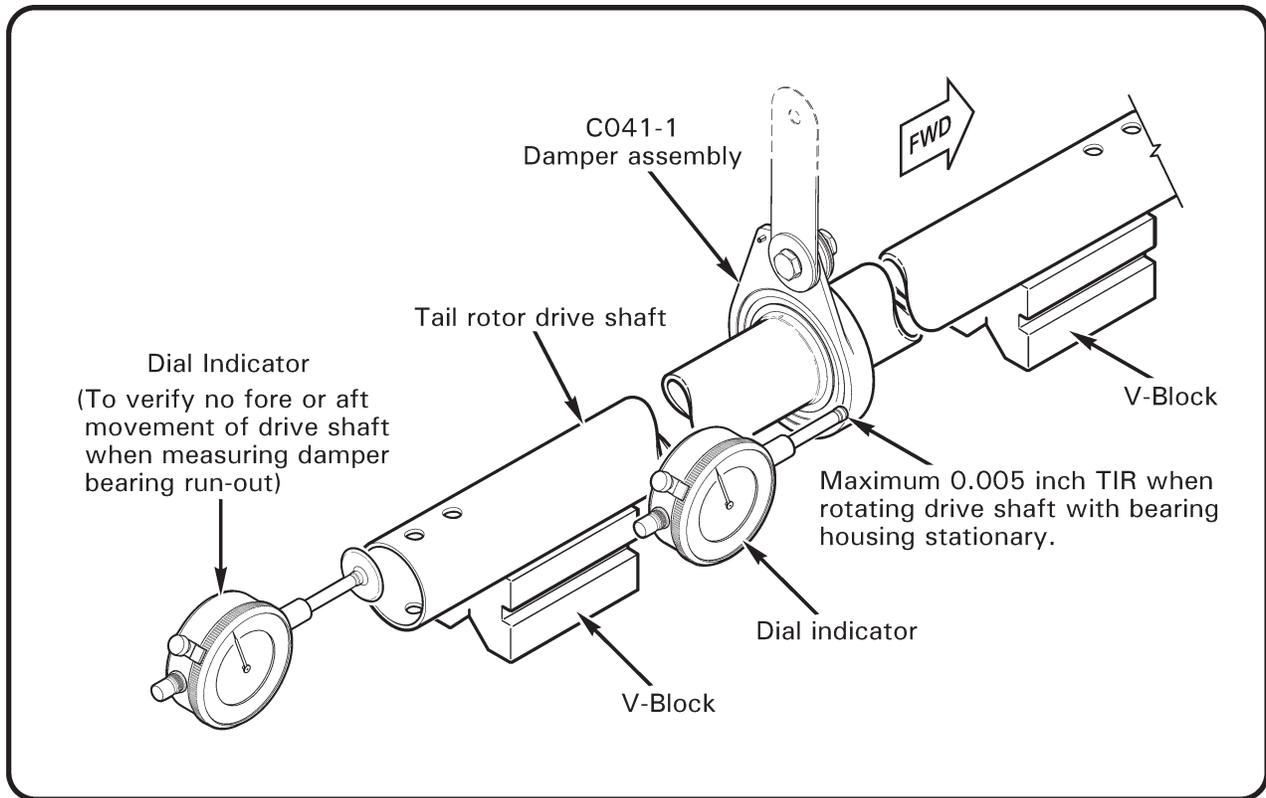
C DAMPER BEARING RUN-OUT INSPECTION
